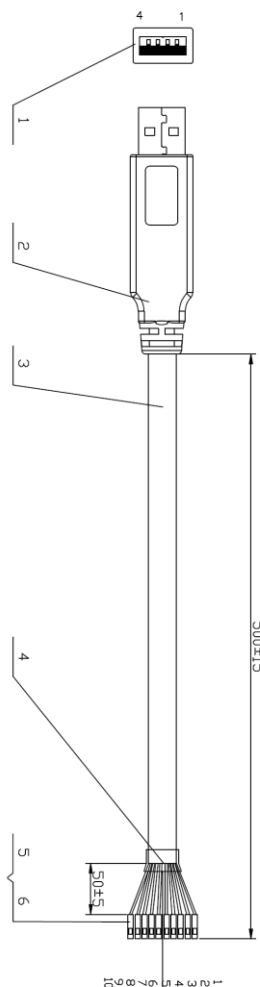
C232HM MPSSE Cable Mechanical Details (dimensions in mm)
